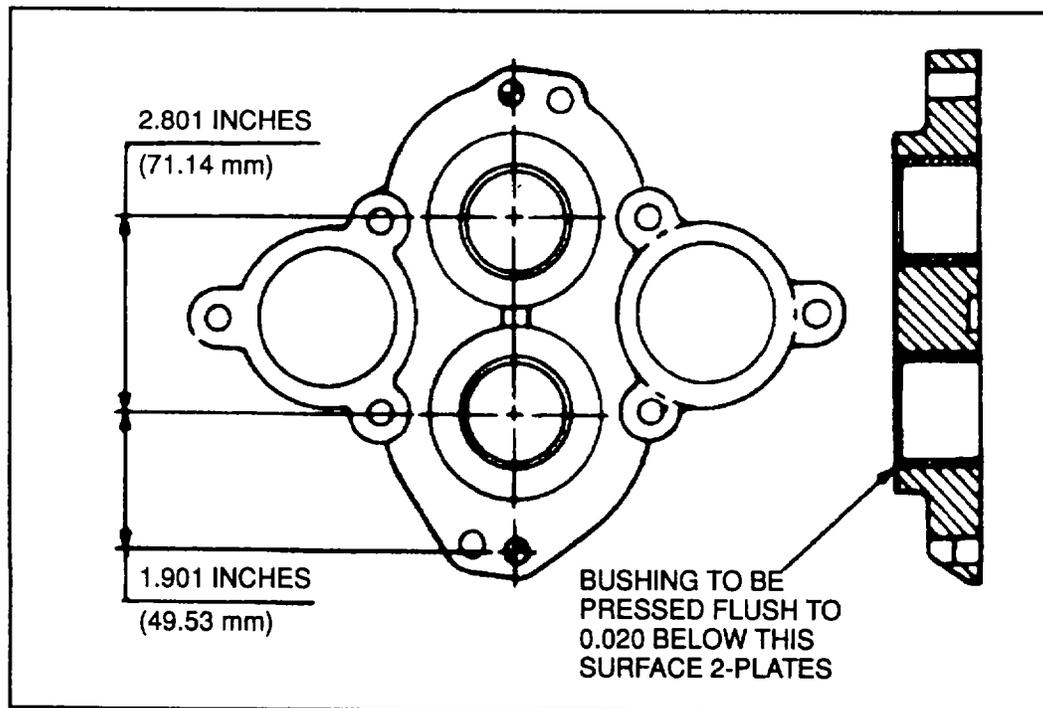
Dimensions of the Bushings In the Lubricating Oil Pump Cover
